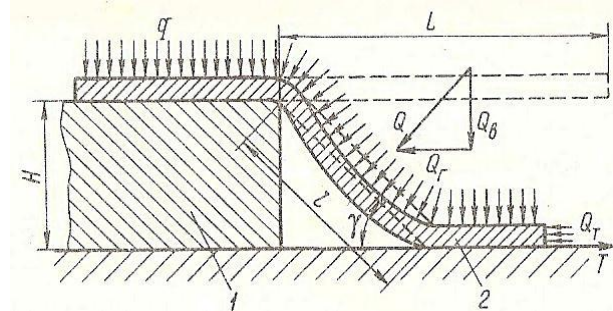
Stamping with flexible area scheme: 1-die, 2-workpiece
